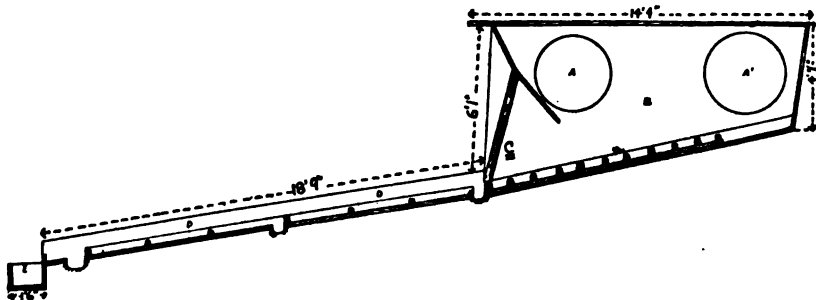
LONGITUDINAL SECTION OF WASHING MACHINE.
